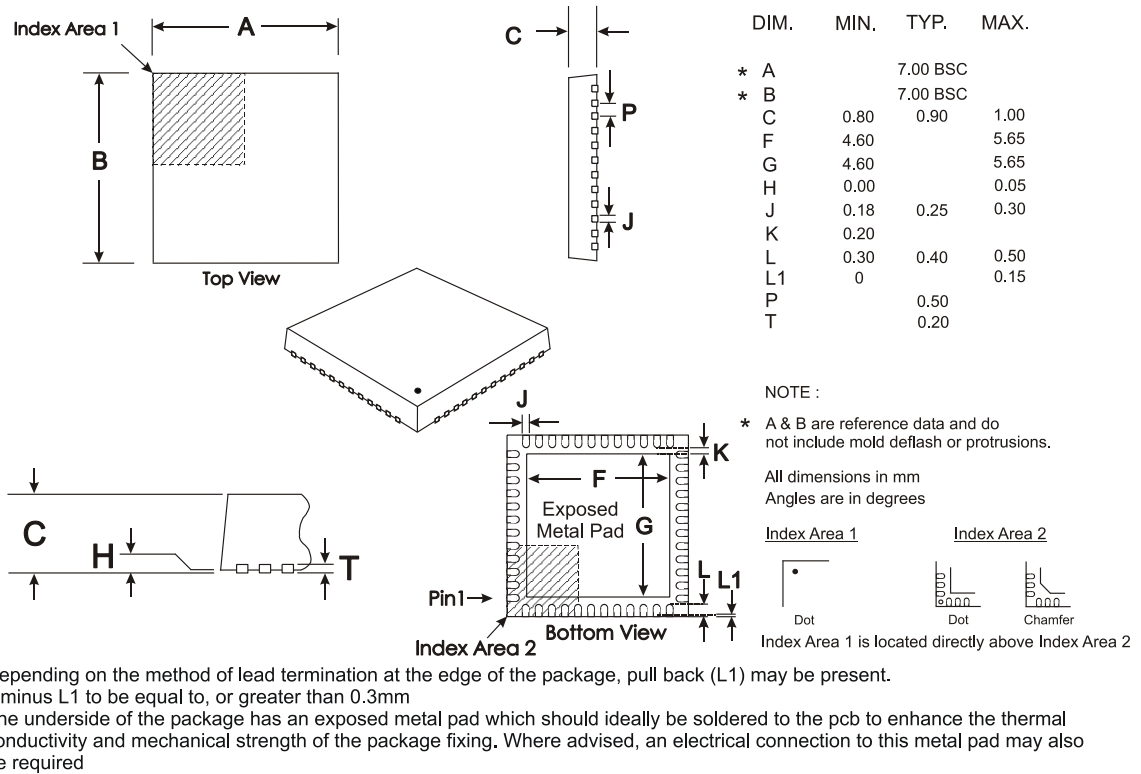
Mechanical Outline for 48-pad VQFN Package (Q3)
